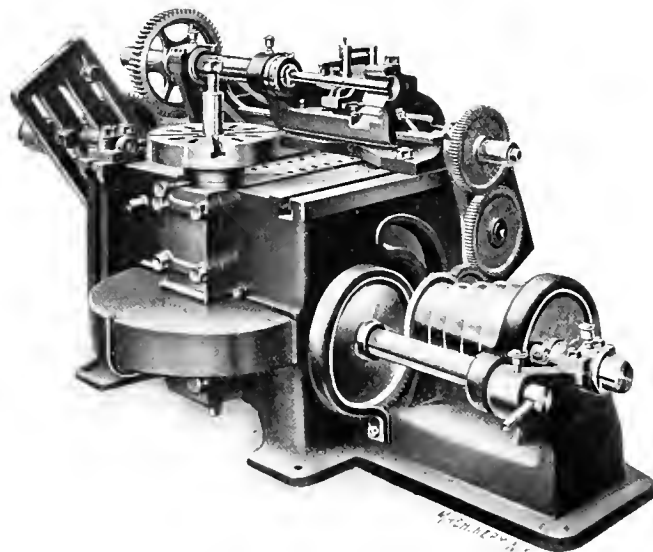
The Wallwork Machine, which cuts the Teeth of Worm-wheels with a Fly-tool without using Differential Gearing.
